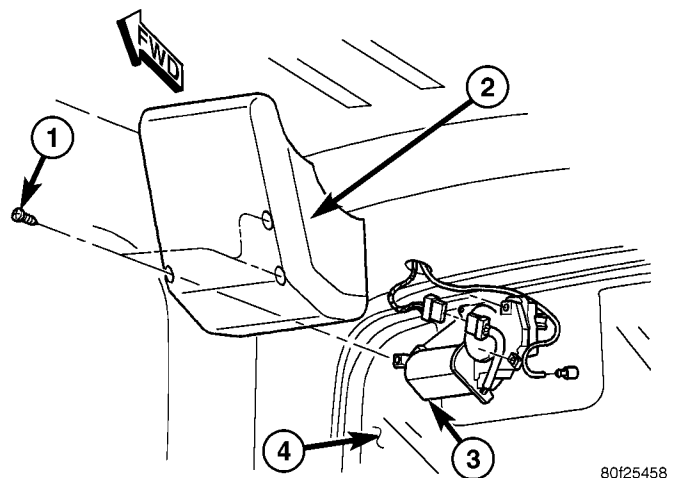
Rear Wiper Motor Trim Cover Remove/Install
